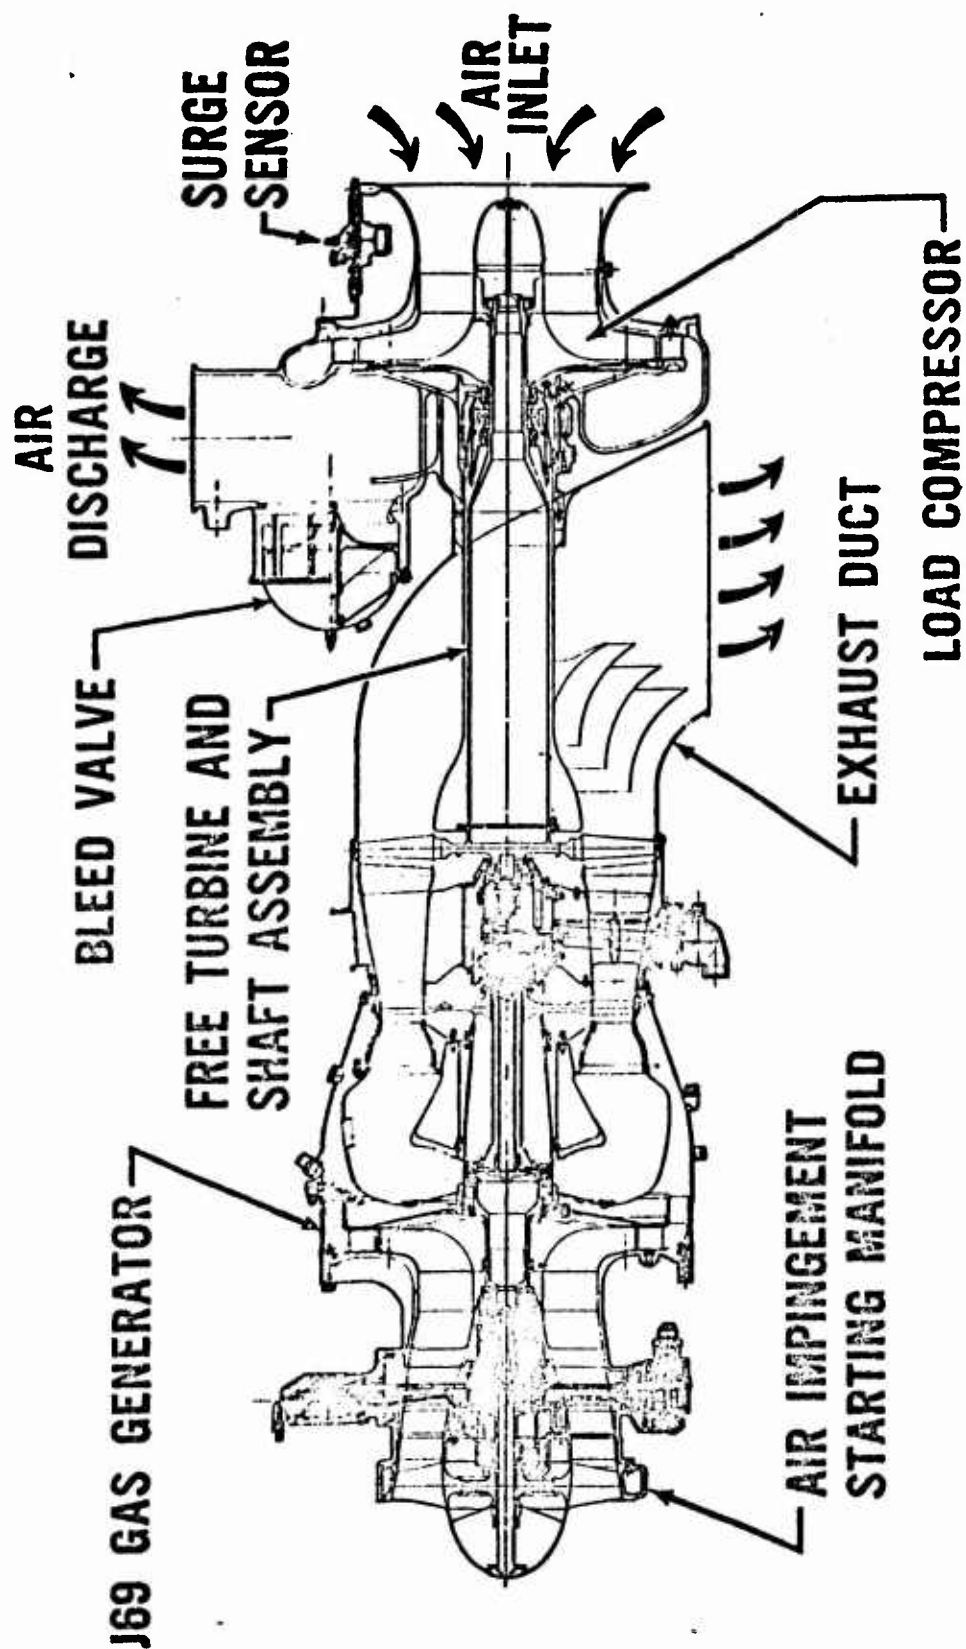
J69-T-35 High Bleed Pumping Engine (Cross-section)
